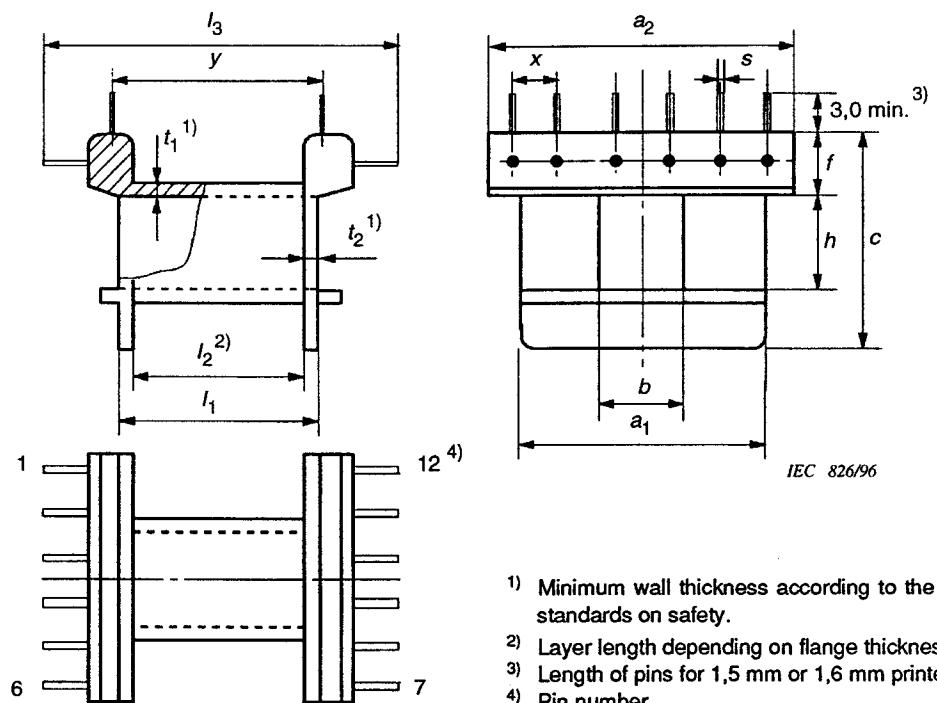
YEI 1 coil formers for printed wiring board mounting, level mounting style
